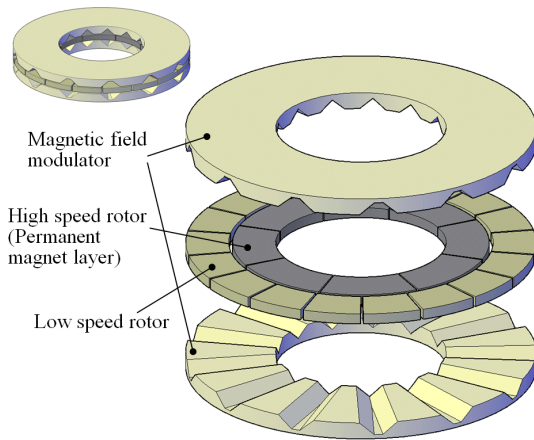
Perspective layout of the proposed axial magnet gear utilizing both sides of permanent magnets
